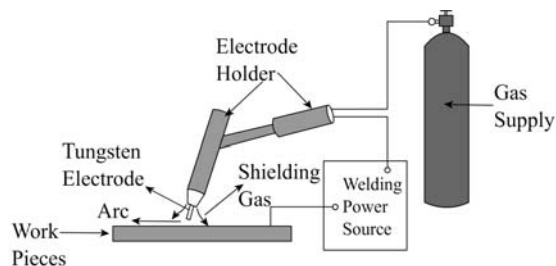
Schematic of tungsten inert gas welding process
